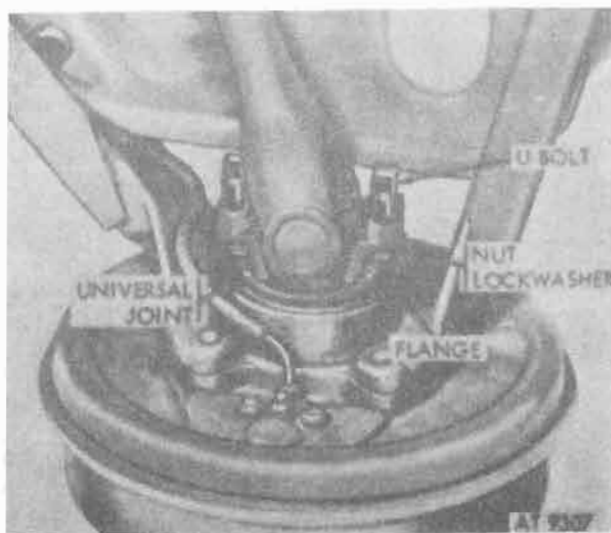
Rear wheel flange and drive shaft universal joint (M151, M151A1, M151A1C and M718 vehicles).
